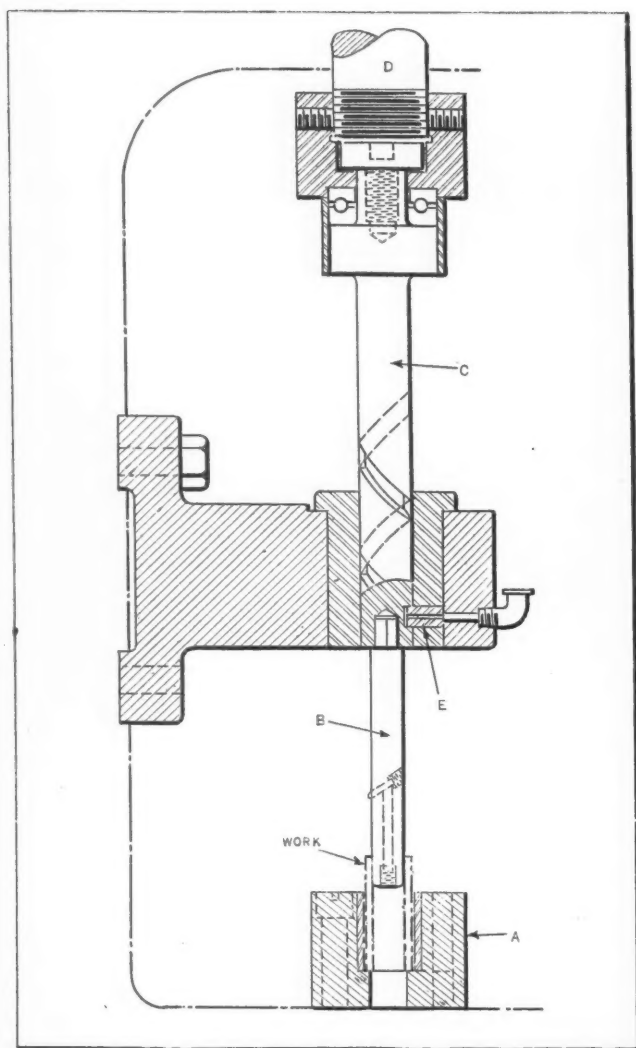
Equipment for Producing Oil-grooves in Automobile Valve Tappet Guides
